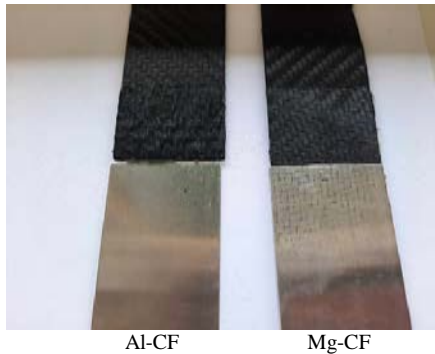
Appearance of adhesive joints after load-bearing capacity testing
